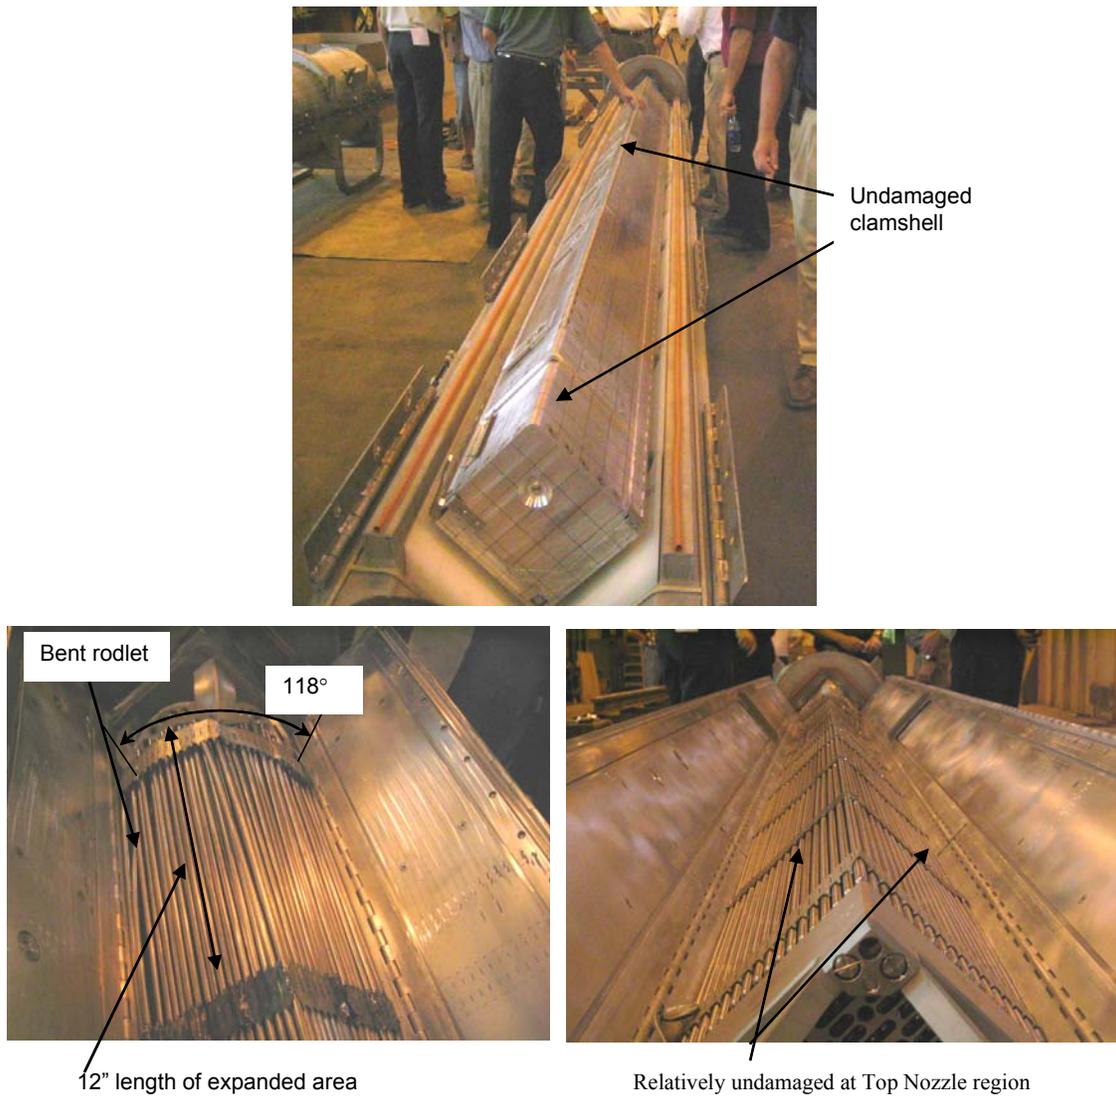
QTU-2 Clamshell and Fuel Assembly After Drop Tests
